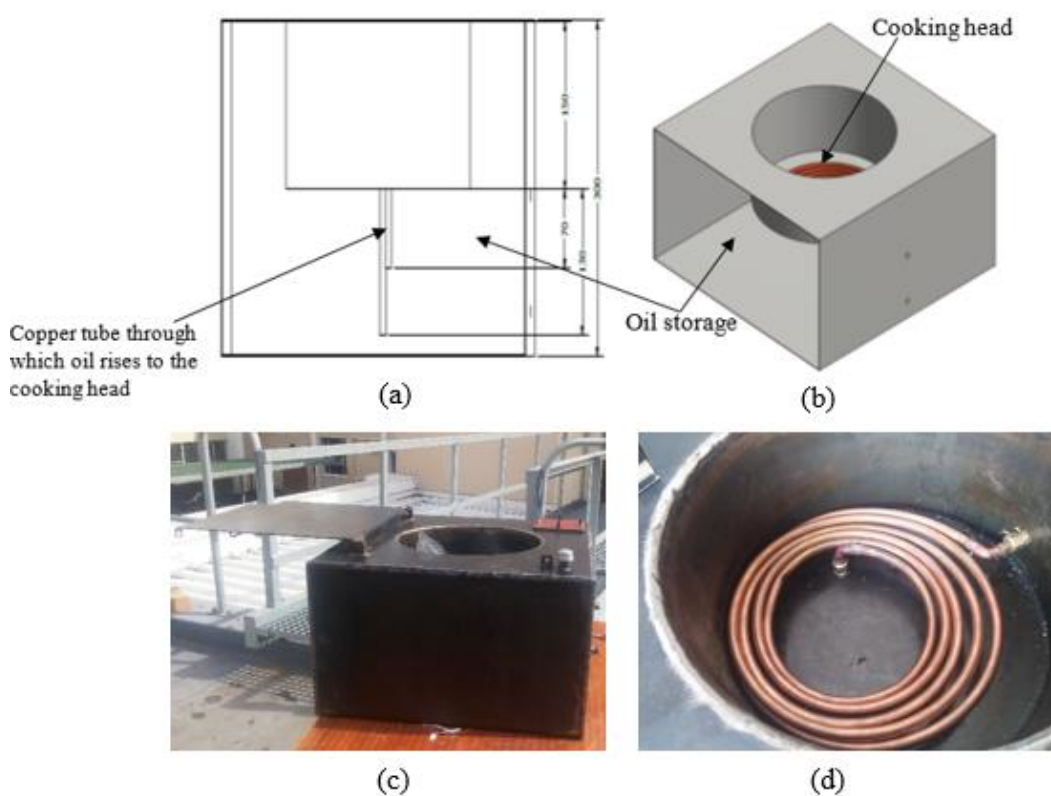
Thermal energy storage and cooker: dimensions (a); cut-away 3D CAD drawing (b); fabricated tank (c); cook top (d)
